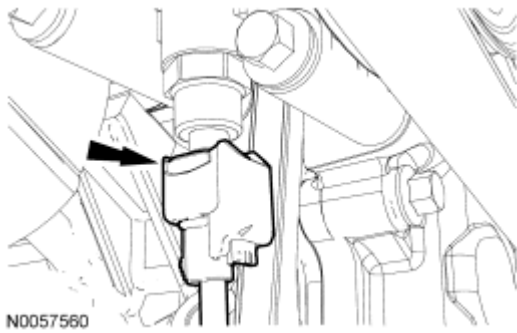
Identifying Power Steering Pressure (PSP) Switch Electrical Connector
